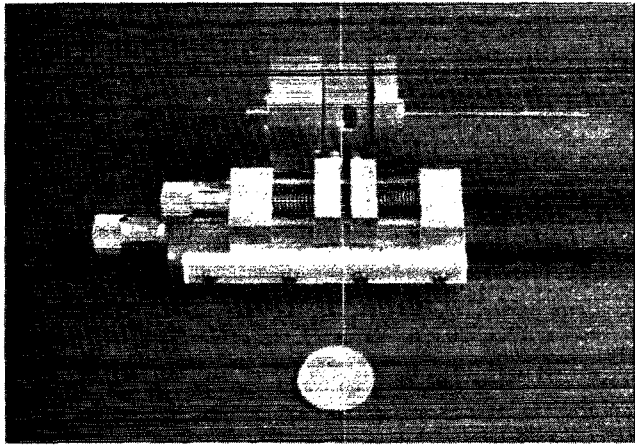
The double-slug tuner incorporating the mounting jig, driving screws, UT-85 coaxial cable, and SMA connector.
